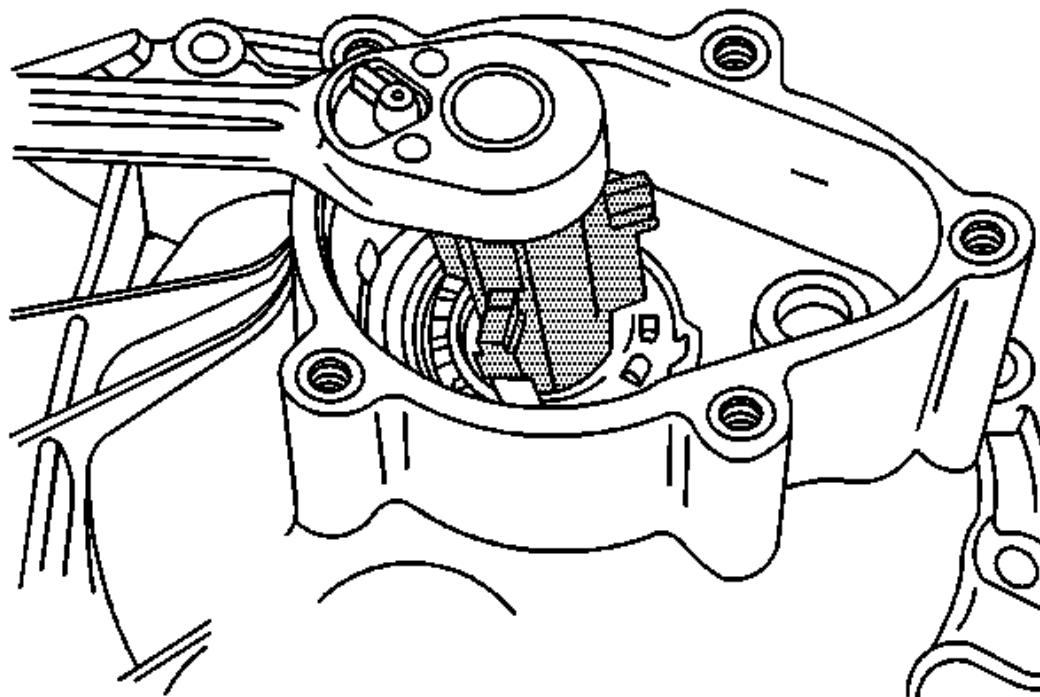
Differential Bearing Adjuster Nuts & Bearing Cups
